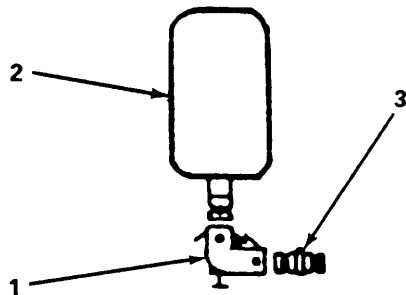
Elbow Coupler Valve, Removal/Installation.
